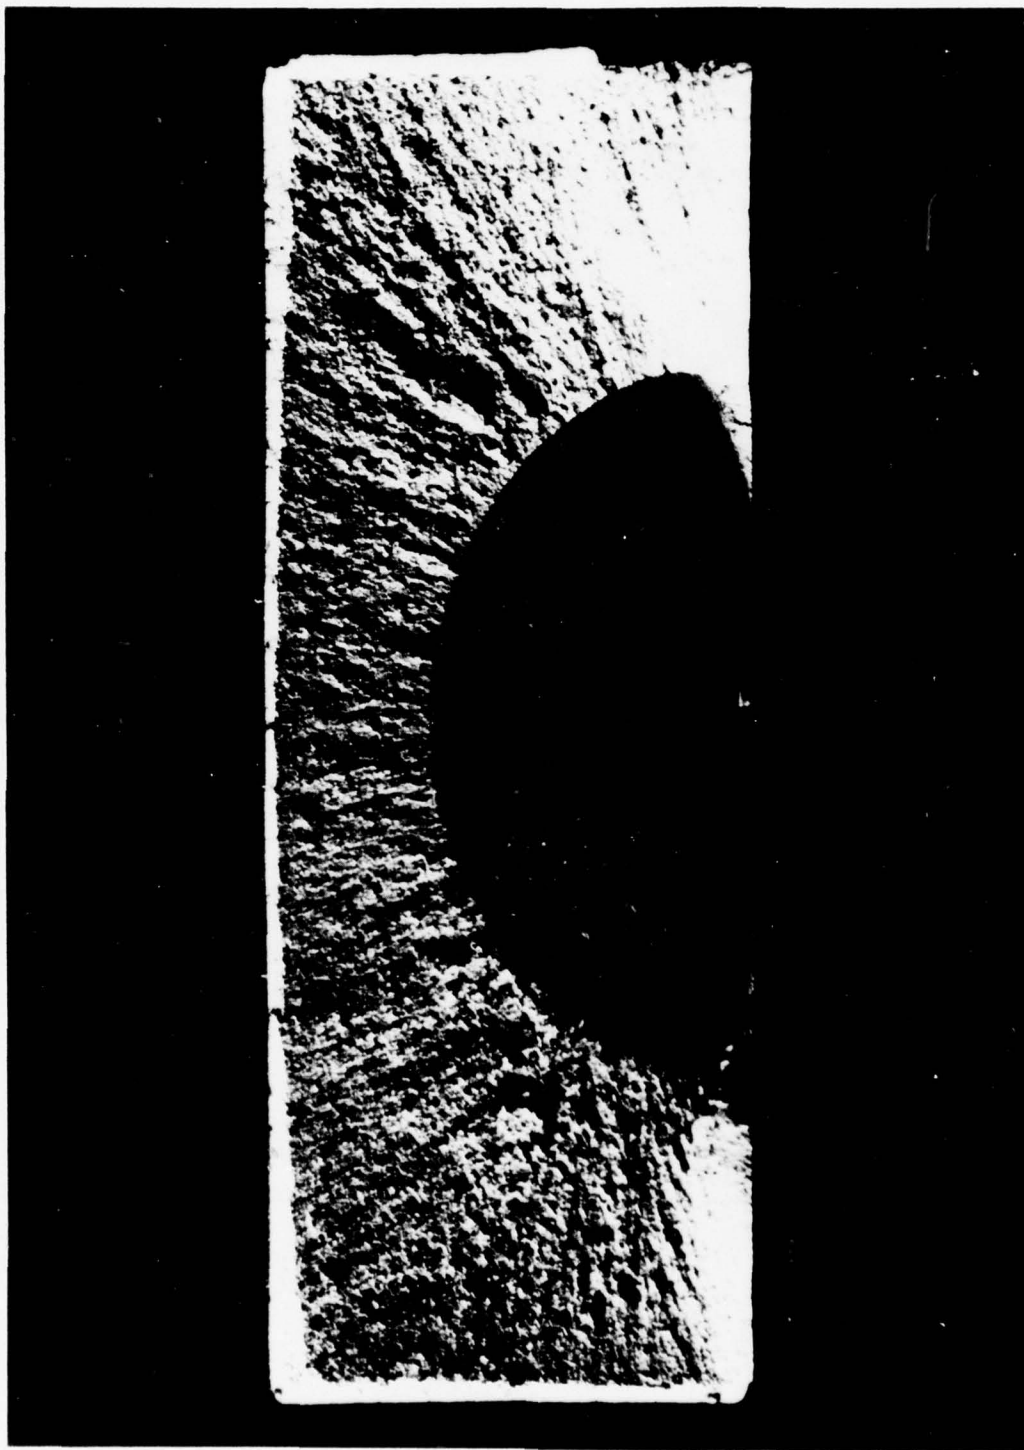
Macrofractograph for 1000°F Surface Flaw Specimen
